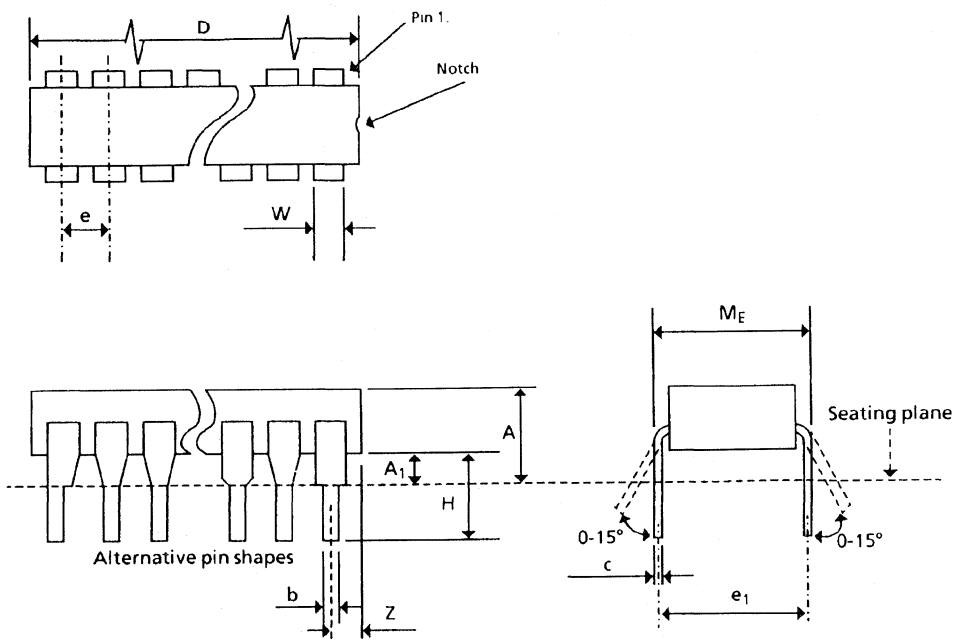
40-lead Ceramic DIL - Solder Seal (Package Style C)
